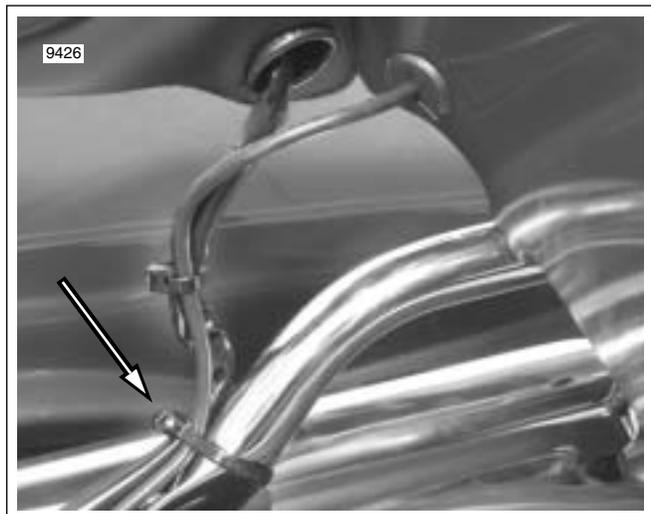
Right Side Luggage Rack Rail (FLHTCU)
